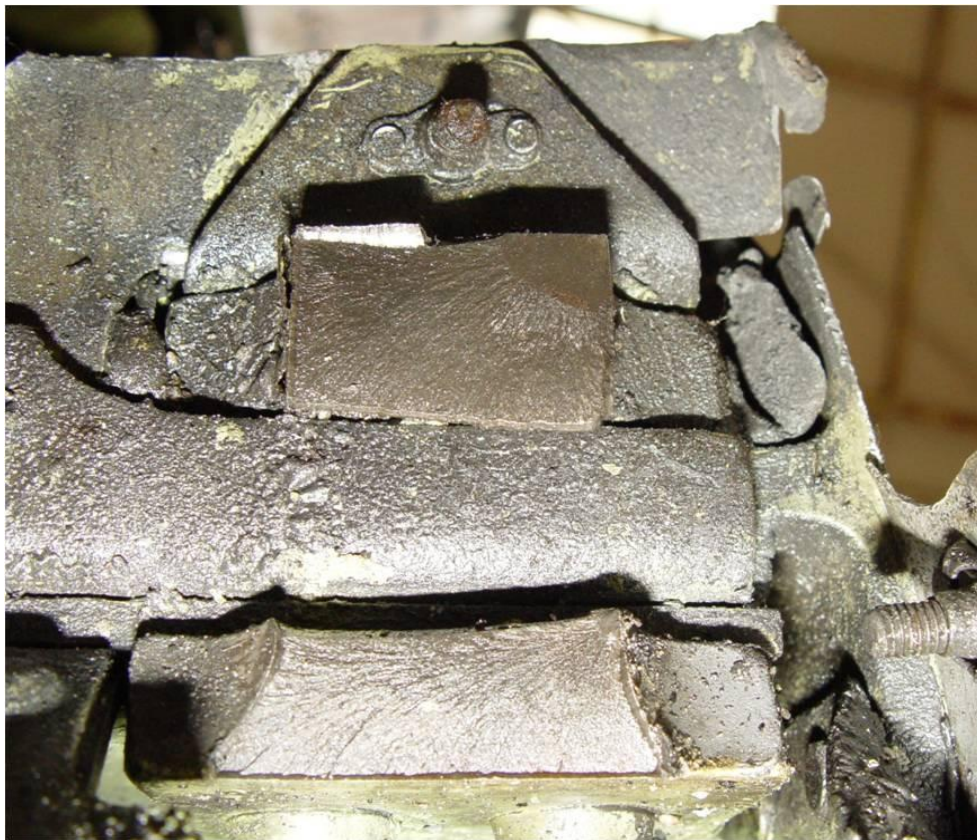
Fracture faces of the No. 2 pylon mid-spar fitting
